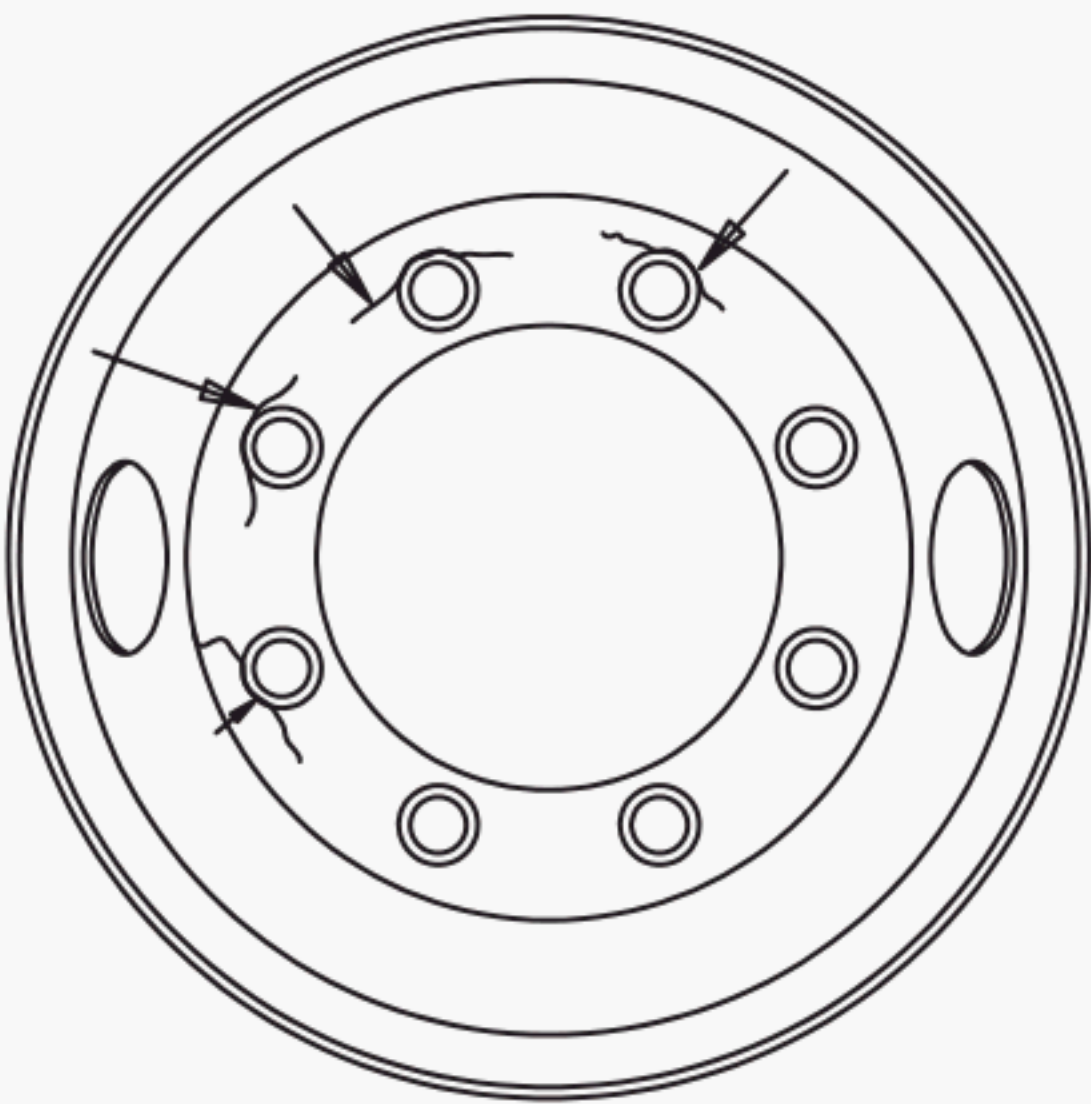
Circumferential cracks on mounting area of hub-piloted wheels
